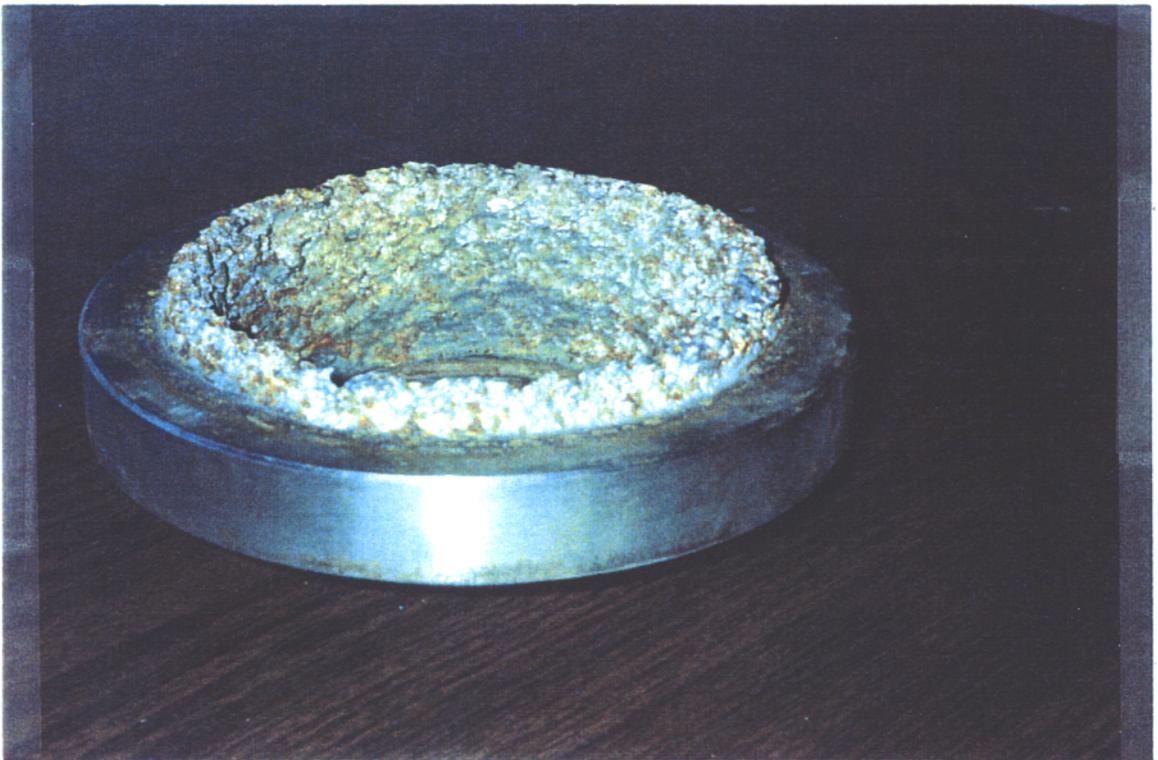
Seal Plate Adapter Corrosion (Close-up)
